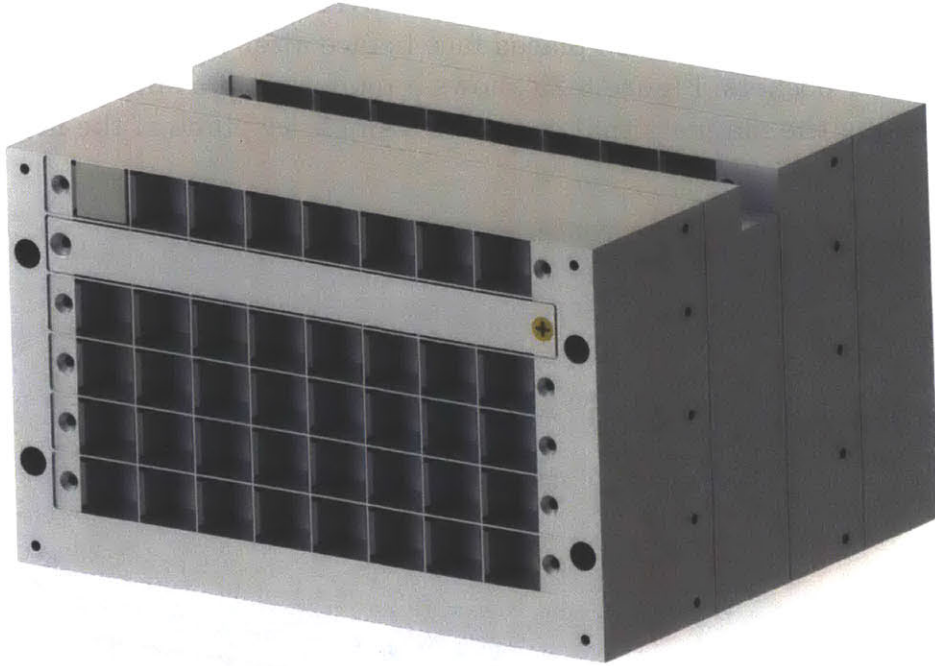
Rendering of all aluminum slices part of magnet assembly.
